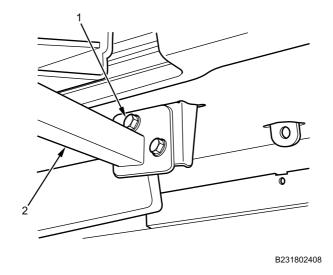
Right Side Gunner Platform Stand Mounting Bolts.
